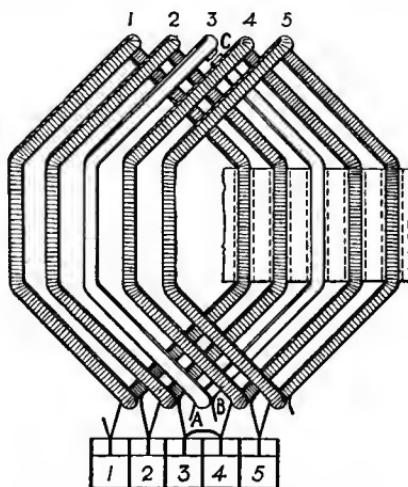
Method of Cutting Out Coils in a Lap Winding
